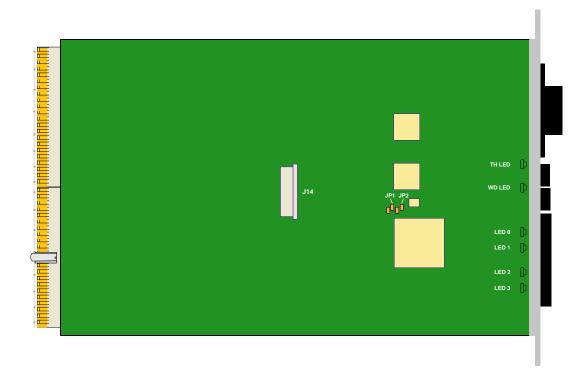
4HP CP3002 Board Layout (Bottom View)
